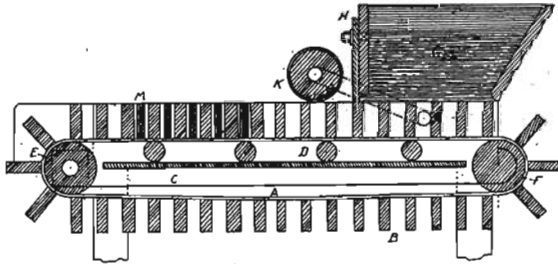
Sketch of machine for making gypsum boards. (Described in text.)
